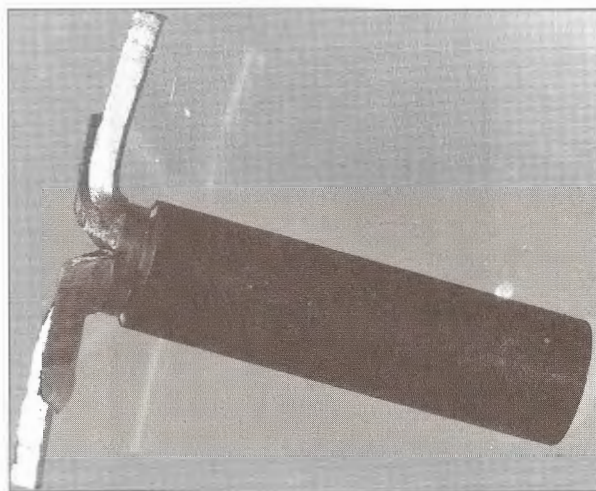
Sample of the titanium to stainless steel friction welded joint made through an aluminium interlayer after bending test.
